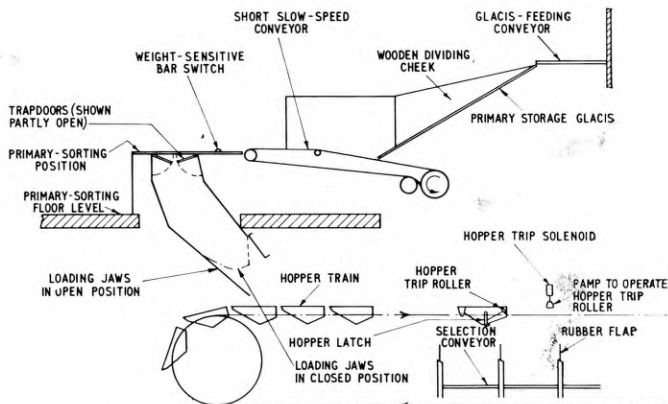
GENERAL ARRANGEMENT OF PRIMARY-SORTING MACHINE
